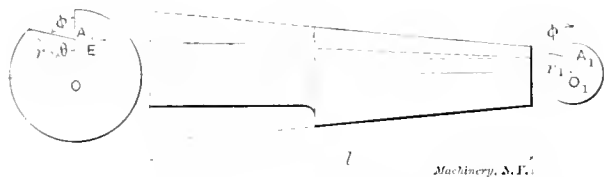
Diagram for Calculating Setting Angle for Taper Reamer.
